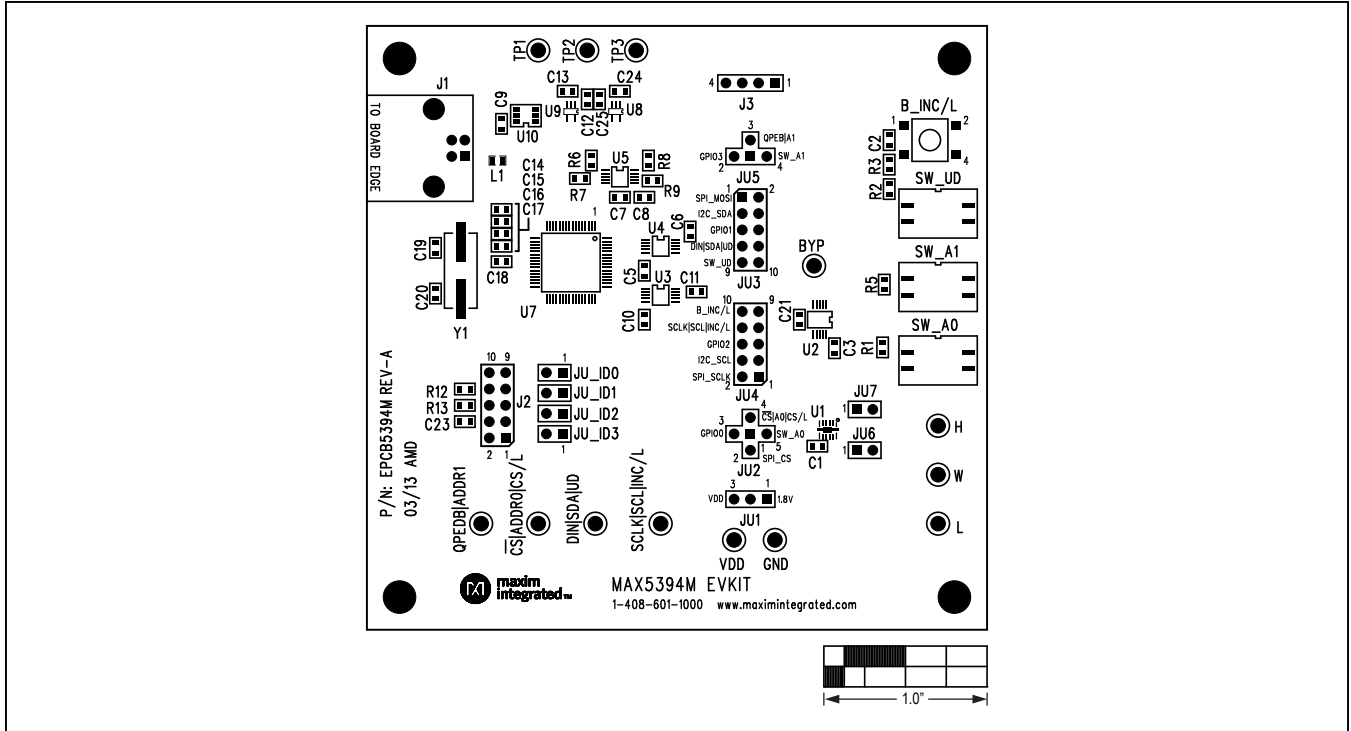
MAX5394M EV Kit Component Placement Guide—Component Side
